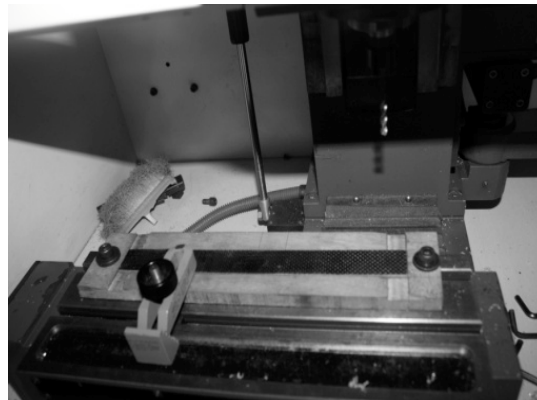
Drilling HFRE composite specimen using CNC machine with jig
